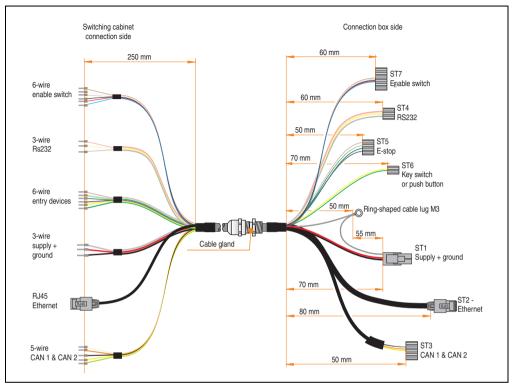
Cable layout for box cable 5CAMPB.0100-10
